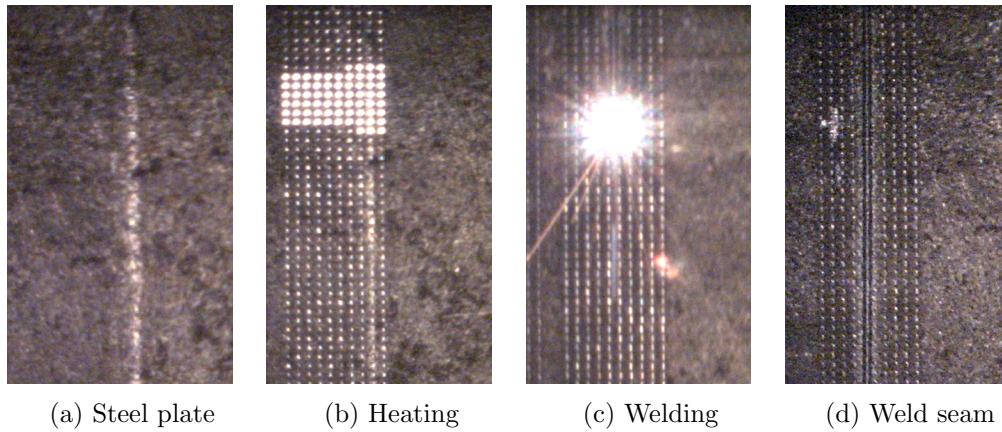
Electron beam preheating and welding automatic process.
